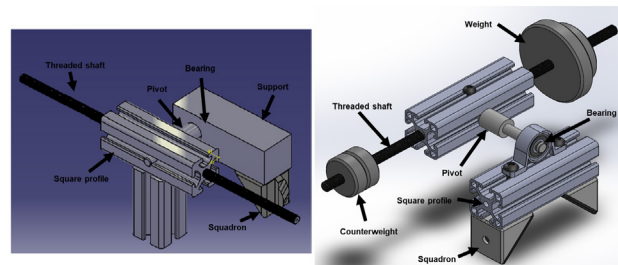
Sample connector arm clamping system: a) current b) redesigned
